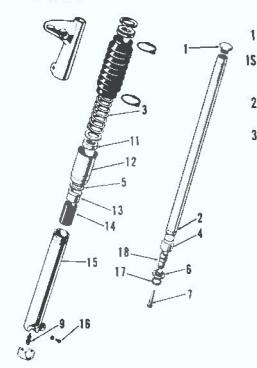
Exploded view of front suspension used on models from serial number DU66246.
